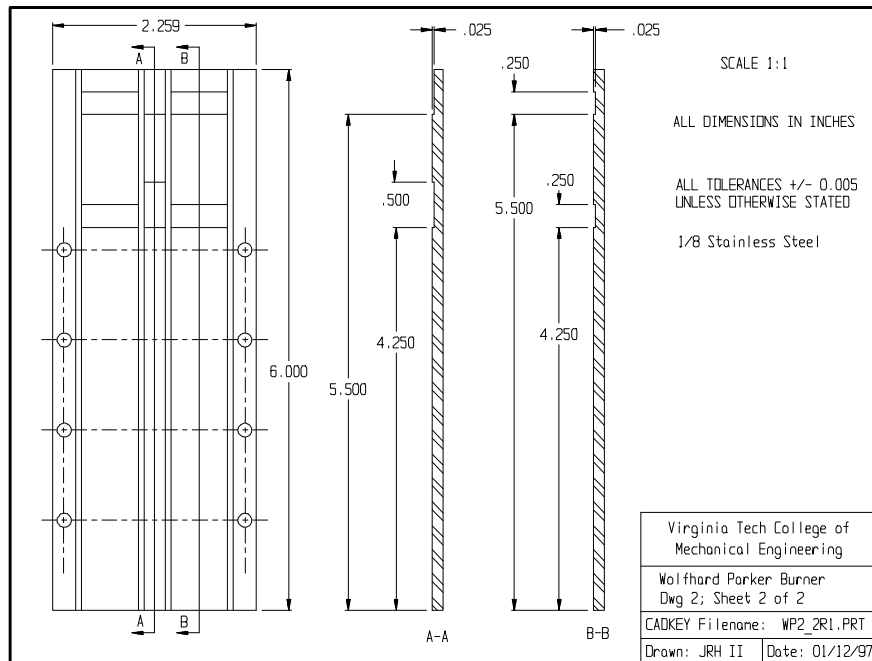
Burner North and South Walls, Drawing 2 Sheet 2 of 2
